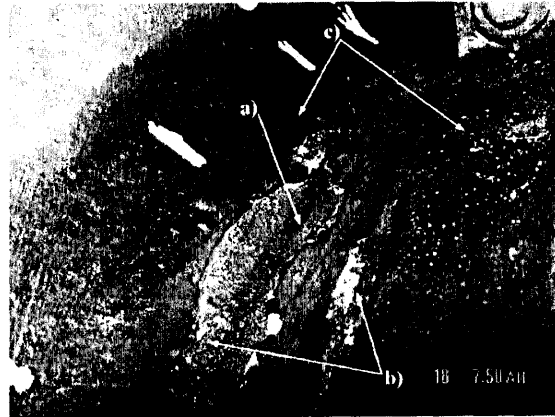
Close view of the transient flange radius after detecting the crack: (a) main crack, (b) anti-corrosive protection layer, and (c) oil residue on corrosion pits.
